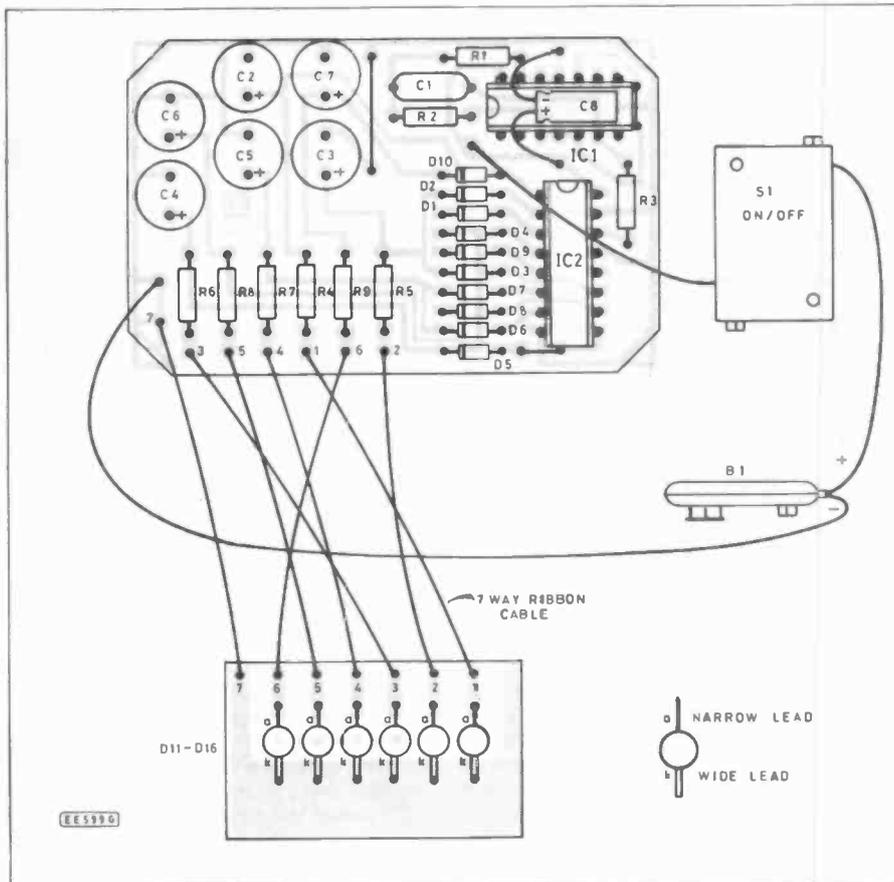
Component layout for main board, display board and interwiring between the two boards. Full size p.c.b. masters are shown below.
